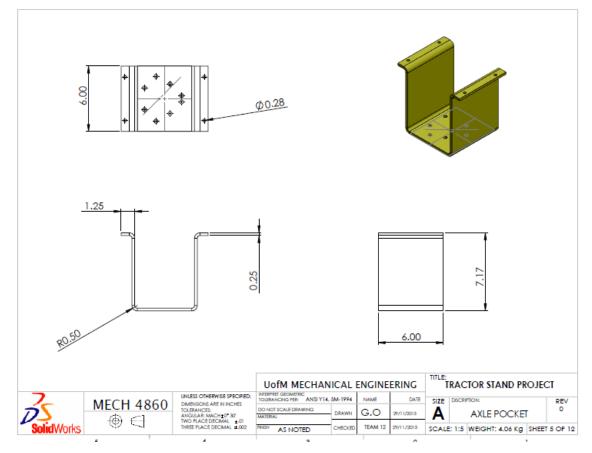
Drawing of final mounting pocket, with dimensions in inches.
